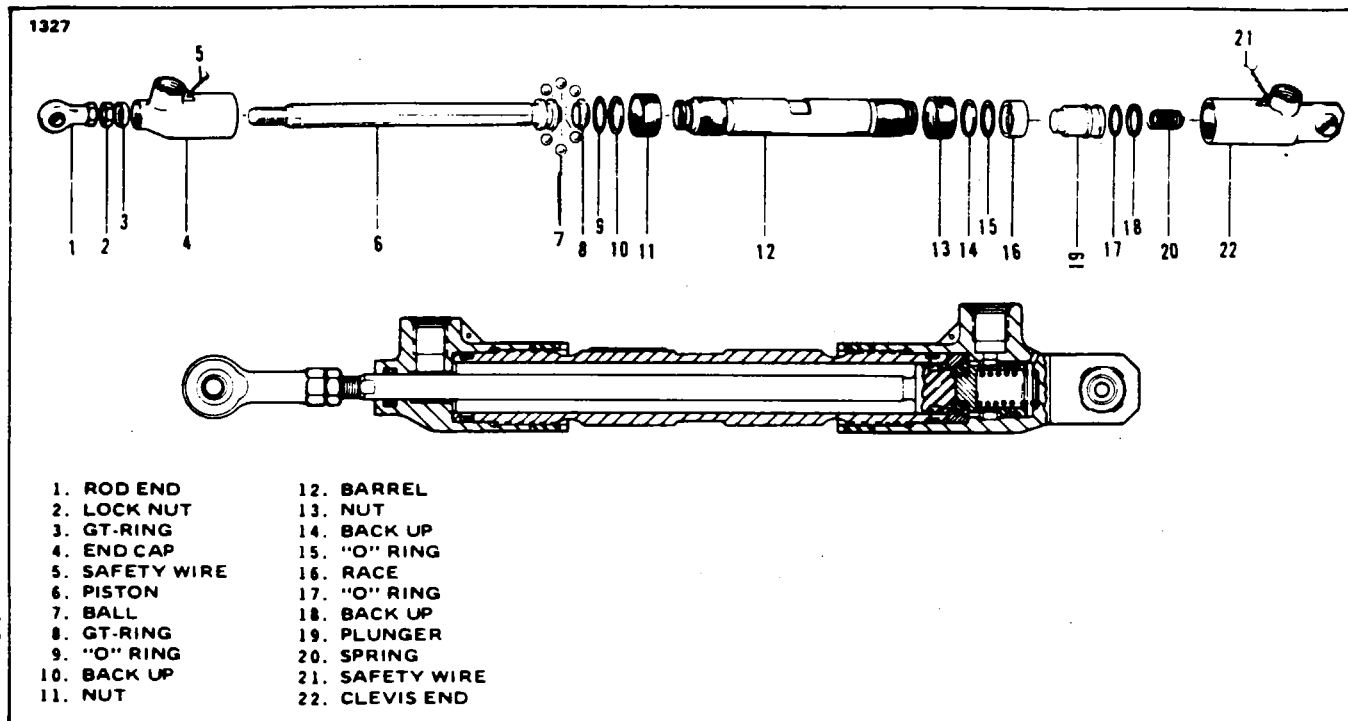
Gear Door Actuating Cylinder (Wiebel Tool WTC 2114-1)
